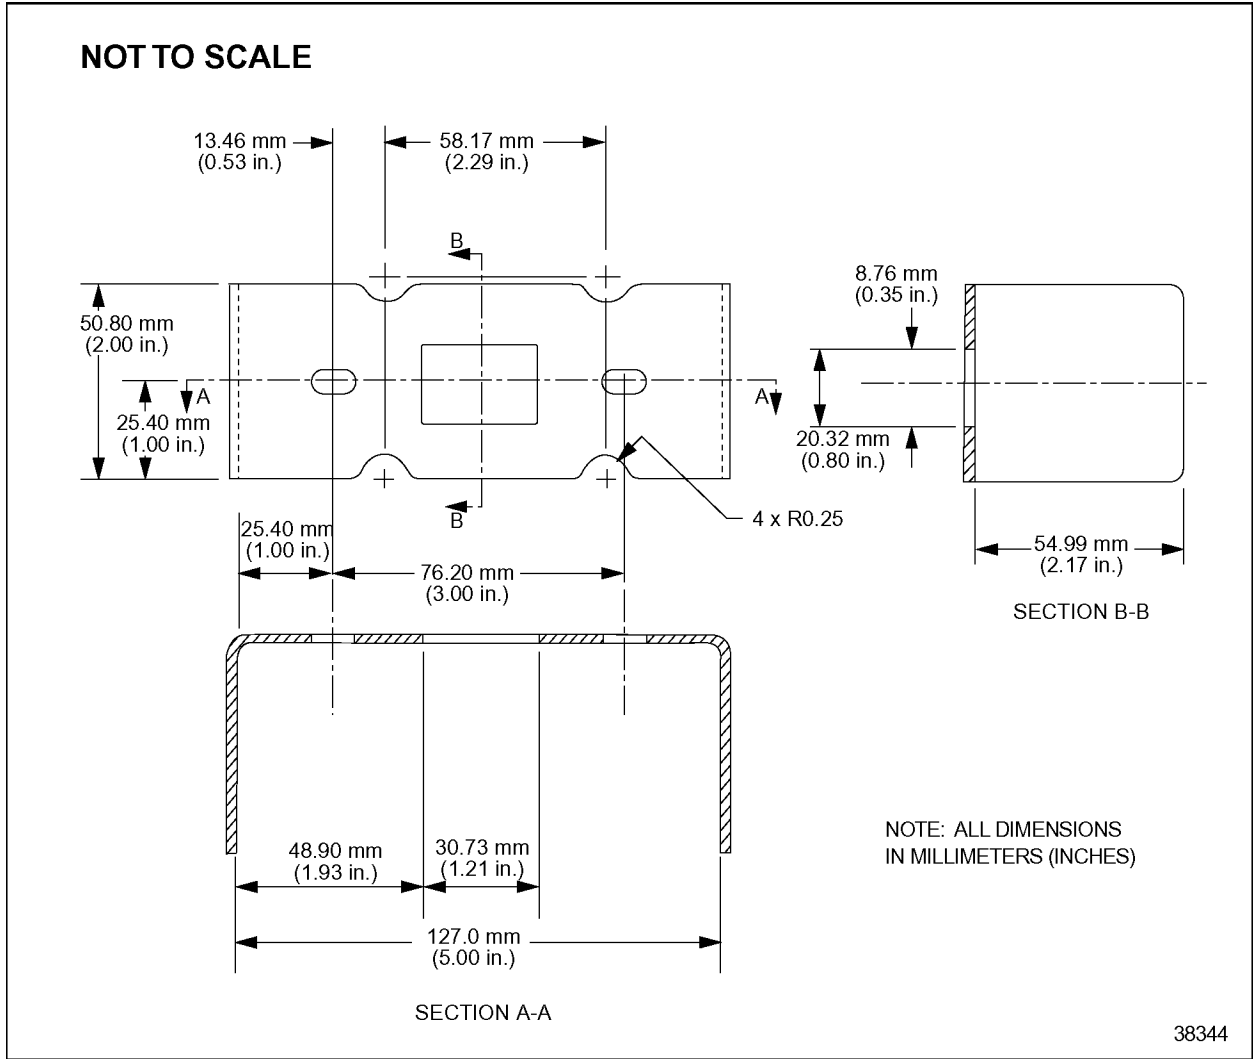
ProDriver DC Flush Mount Mounting Bracket
